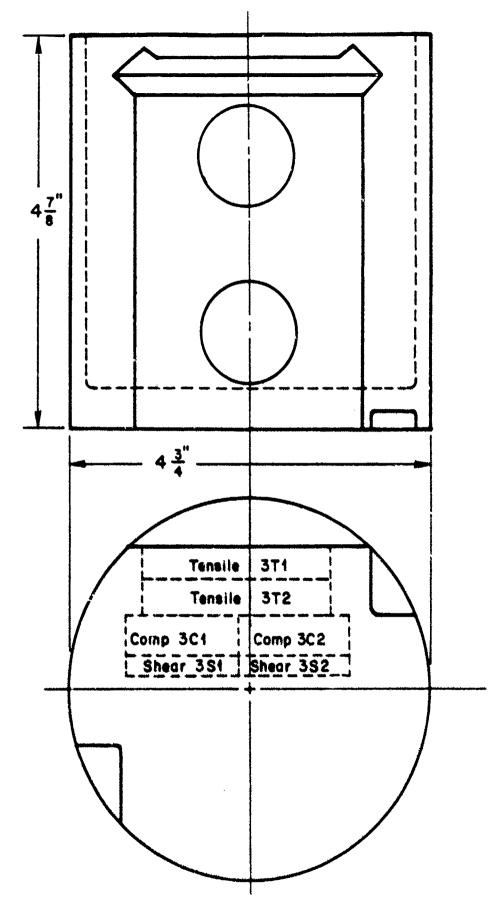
Location of test specimens for 15-5PH (H925) cylinder casting.
